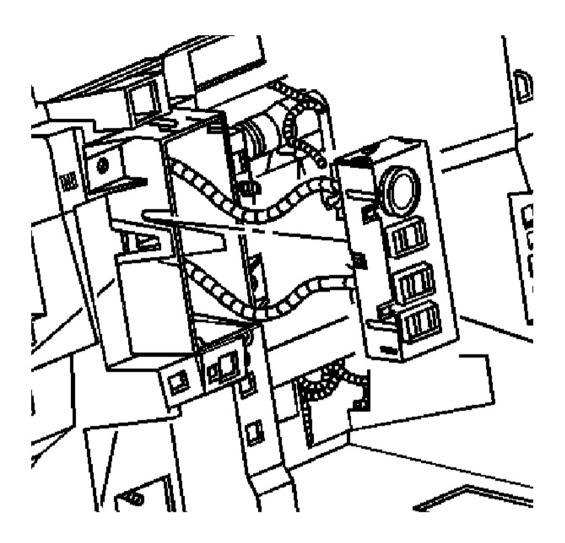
Transfer Case Shift Control Switch Courtesy of GENERAL MOTORS CORP.
